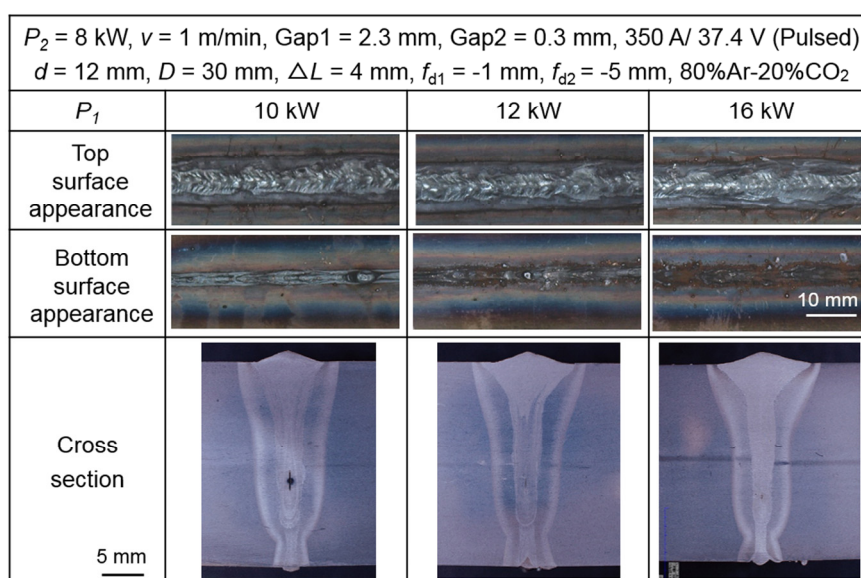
Surface appearances and cross sections of weld beads produced by laser-MAG hybrid welding at various laser powers P_1 .
